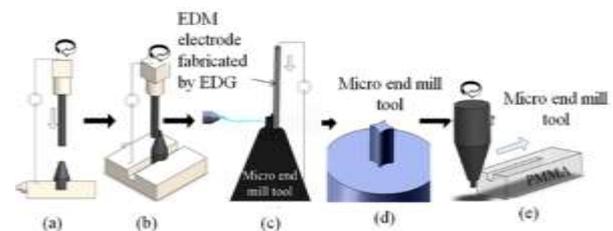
Schematic diagram of tool fabrication process by EDM (a) Flattening of WC workpiece from the top (b) fabrication of square edge micro end mill tool by EDM milling (c) fabrication of curve edge micro end mill tool by die sinking EDM (d) curve edged micro end mill tool and (e) machining of micro channels on PMMA by the fabricated micro tool [8]
